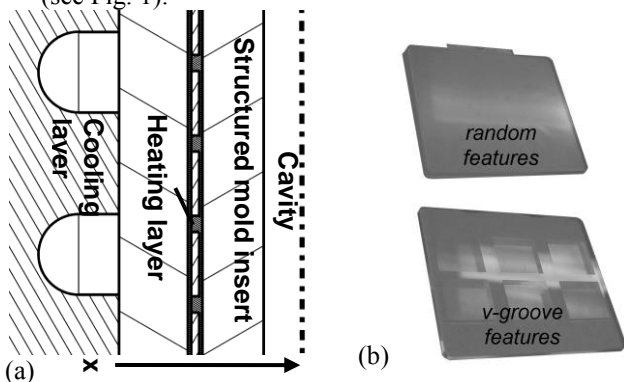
Experimental investigation of the variothermal injection molding process. (a) Cross-sectional view of the mold insert containing the heating and cooling unit (b) picture of the molded parts containing the surface features
